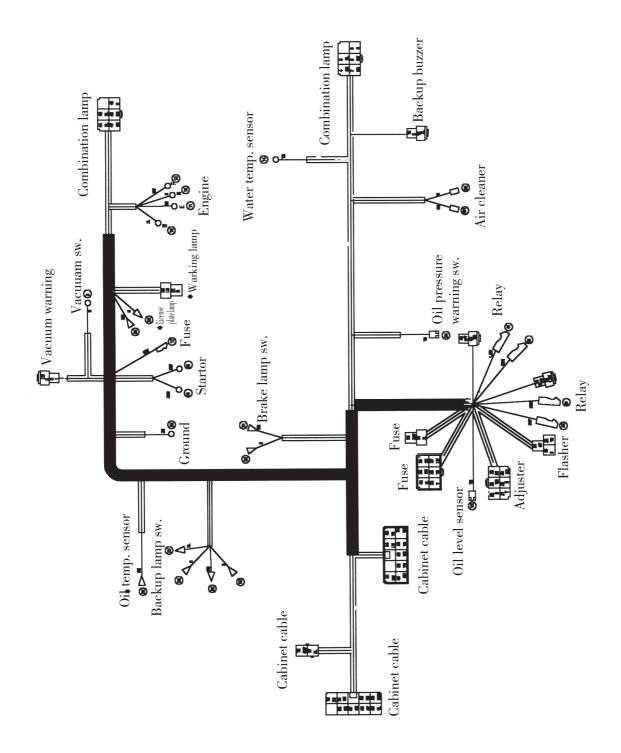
Engine wire harness. CPCD50-70-C -37-
